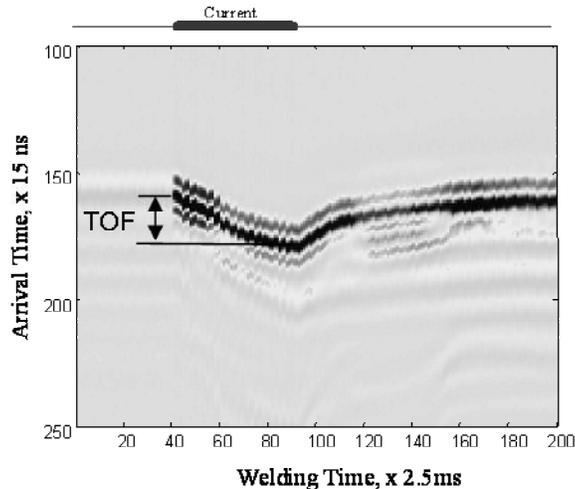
Signature of the spot weld. Through-transmission mode.
